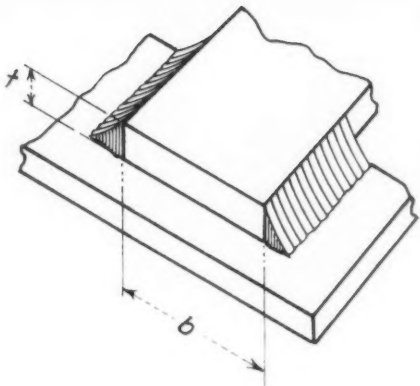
Bar or strap arc welded to plate. Simple sketch used in calculating bead size.
